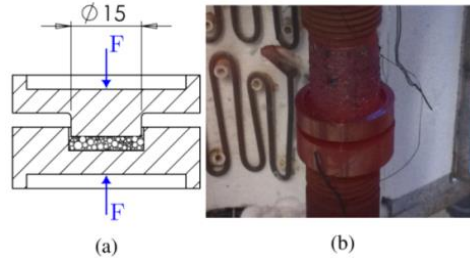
Experimental setup used to compress the powder: (a) schematic representation (dimension in [mm]); (b) photograph of sample in the machine.
